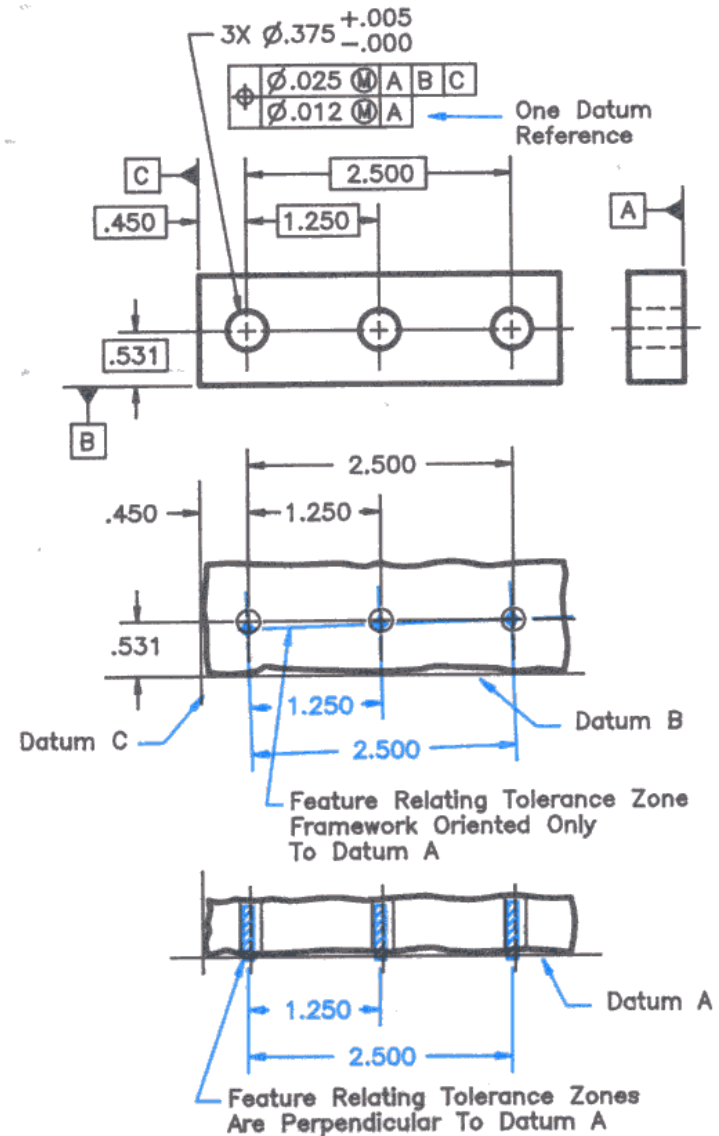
The primary datum reference requires the feature relating tolerance zones to be properly oriented to the primary datum.
